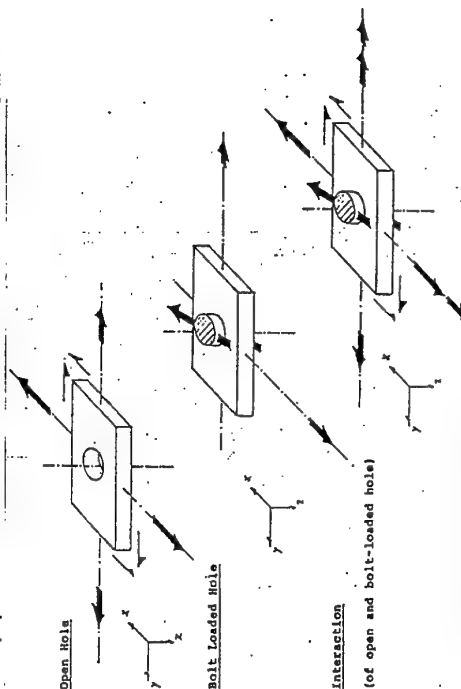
Superposition of the Closed Solutions OPEN HOLE and BOLT-LOADED HOLE-
